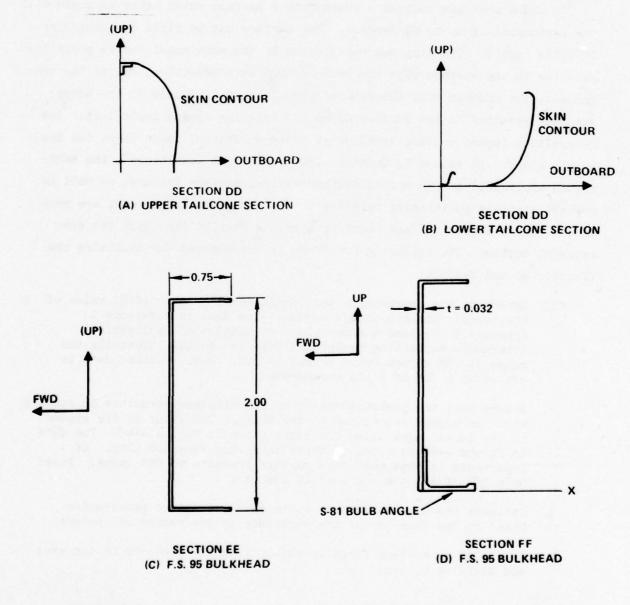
Tail Cone and F.S. 95 Bulkhead Structure Cross Sections
